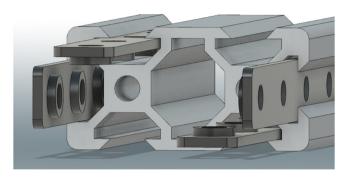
CAD of the aluminum extrusion and the MAKERKLINKs in their correct locations to minimize the number of the links used. The M5 set screws are not included in the CAD for simplicity.
